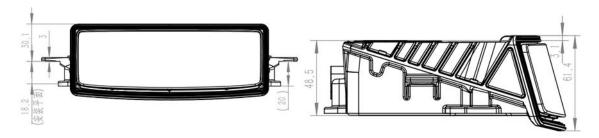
Front view (left) & side view (right) of the equipment (unit: mm)
